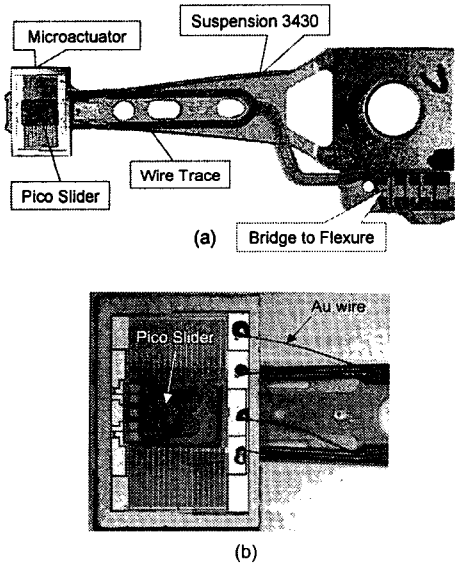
Assembled  $\mu$ -HGA(microactuator Head Gimbal Assembly). (a)  $\mu$ -HGA. (b) Magnified view showing wiring
